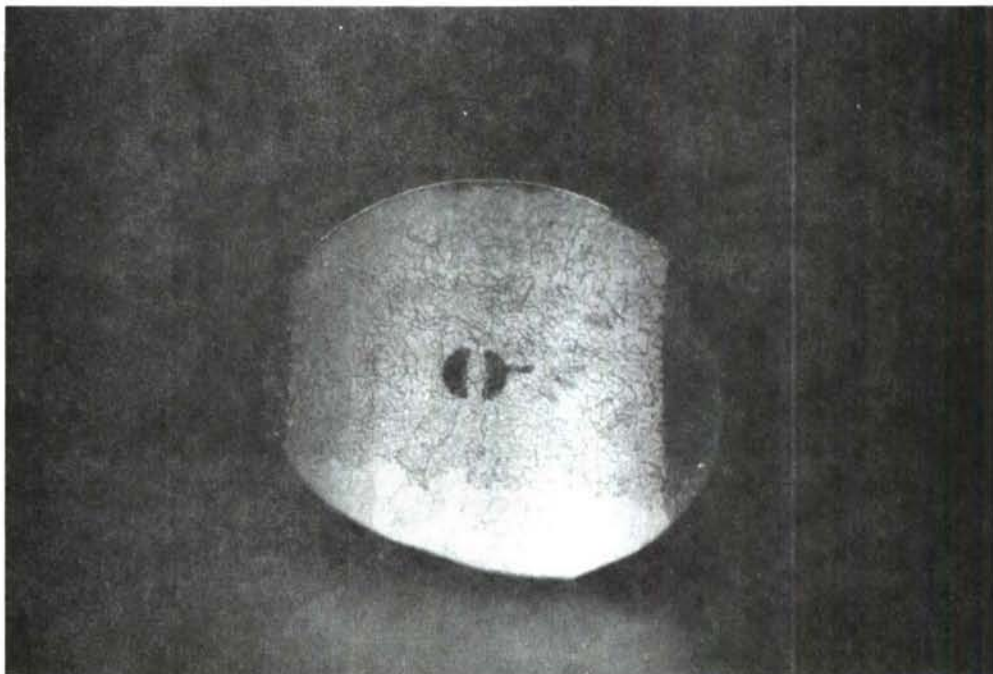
An image of a 0.18 inch long fatigue crack emanating from the edge of an 0.45 inch diameter aluminum rivet in an 0.3 inch thick aluminum fatigue test specimen.
